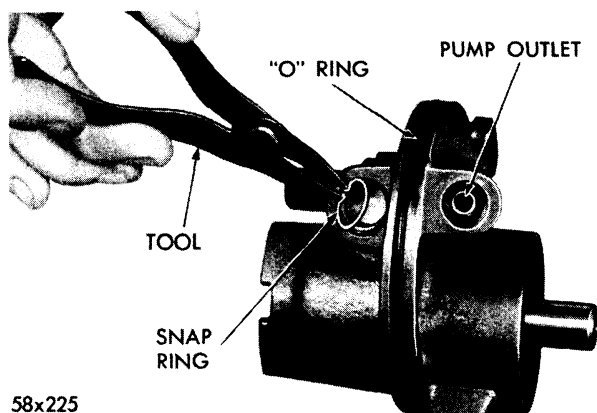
Removing Flow Control Valve Plug Snap Ring
